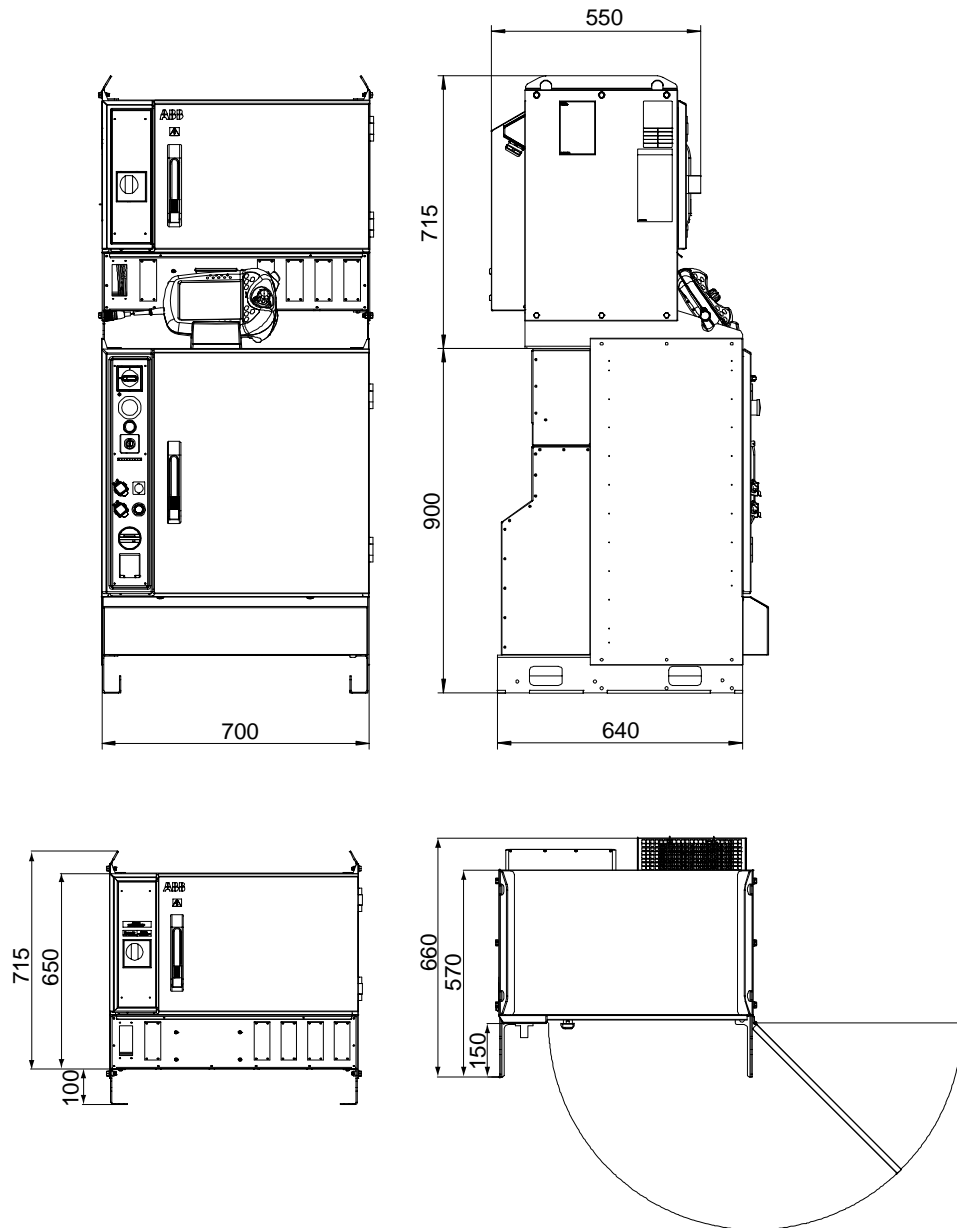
Different views of the SpotWelding cabinet (dimensions in mm).
